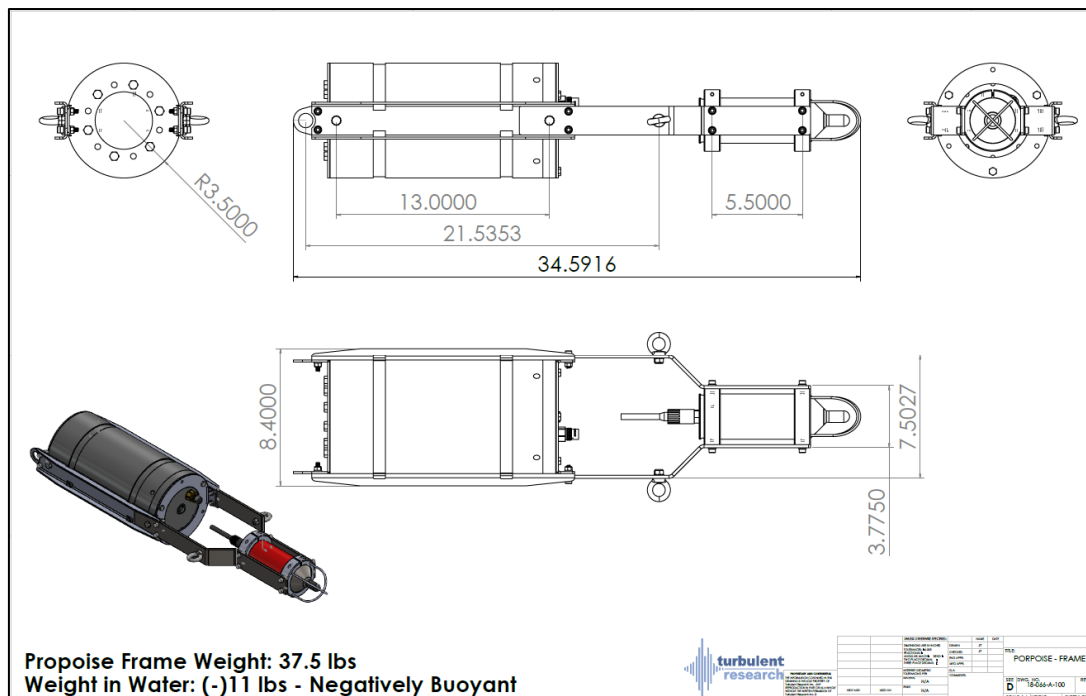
Porpoise 500 mounting frame (dimensions in inches & pounds weight)
